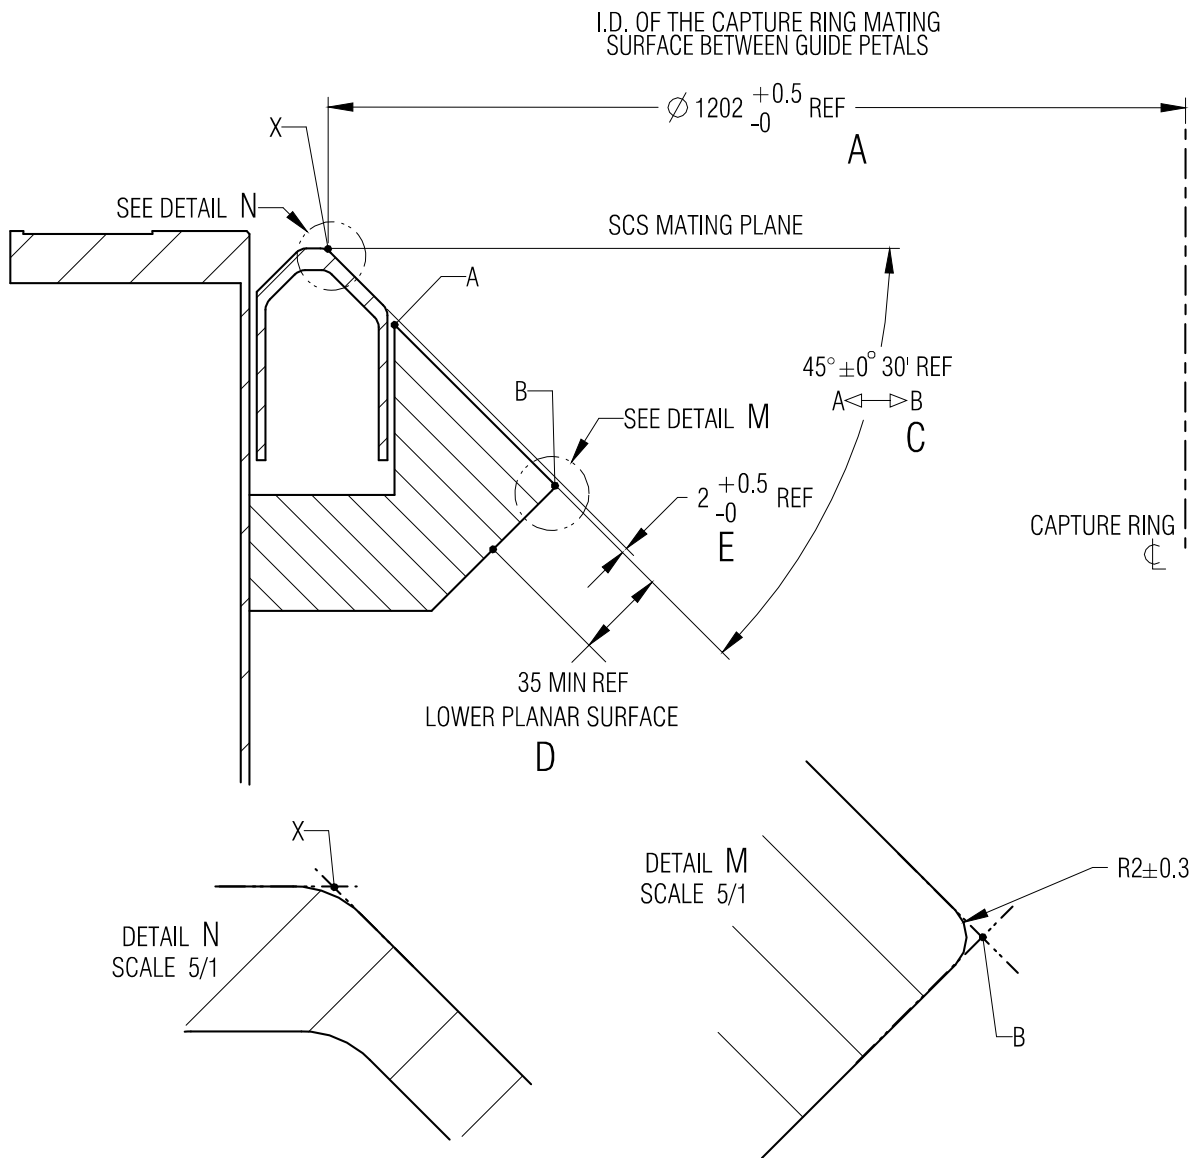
MECHANICAL CAPTURE LATCH STRIKER PARAMETER EXPLANATION - PART 1
